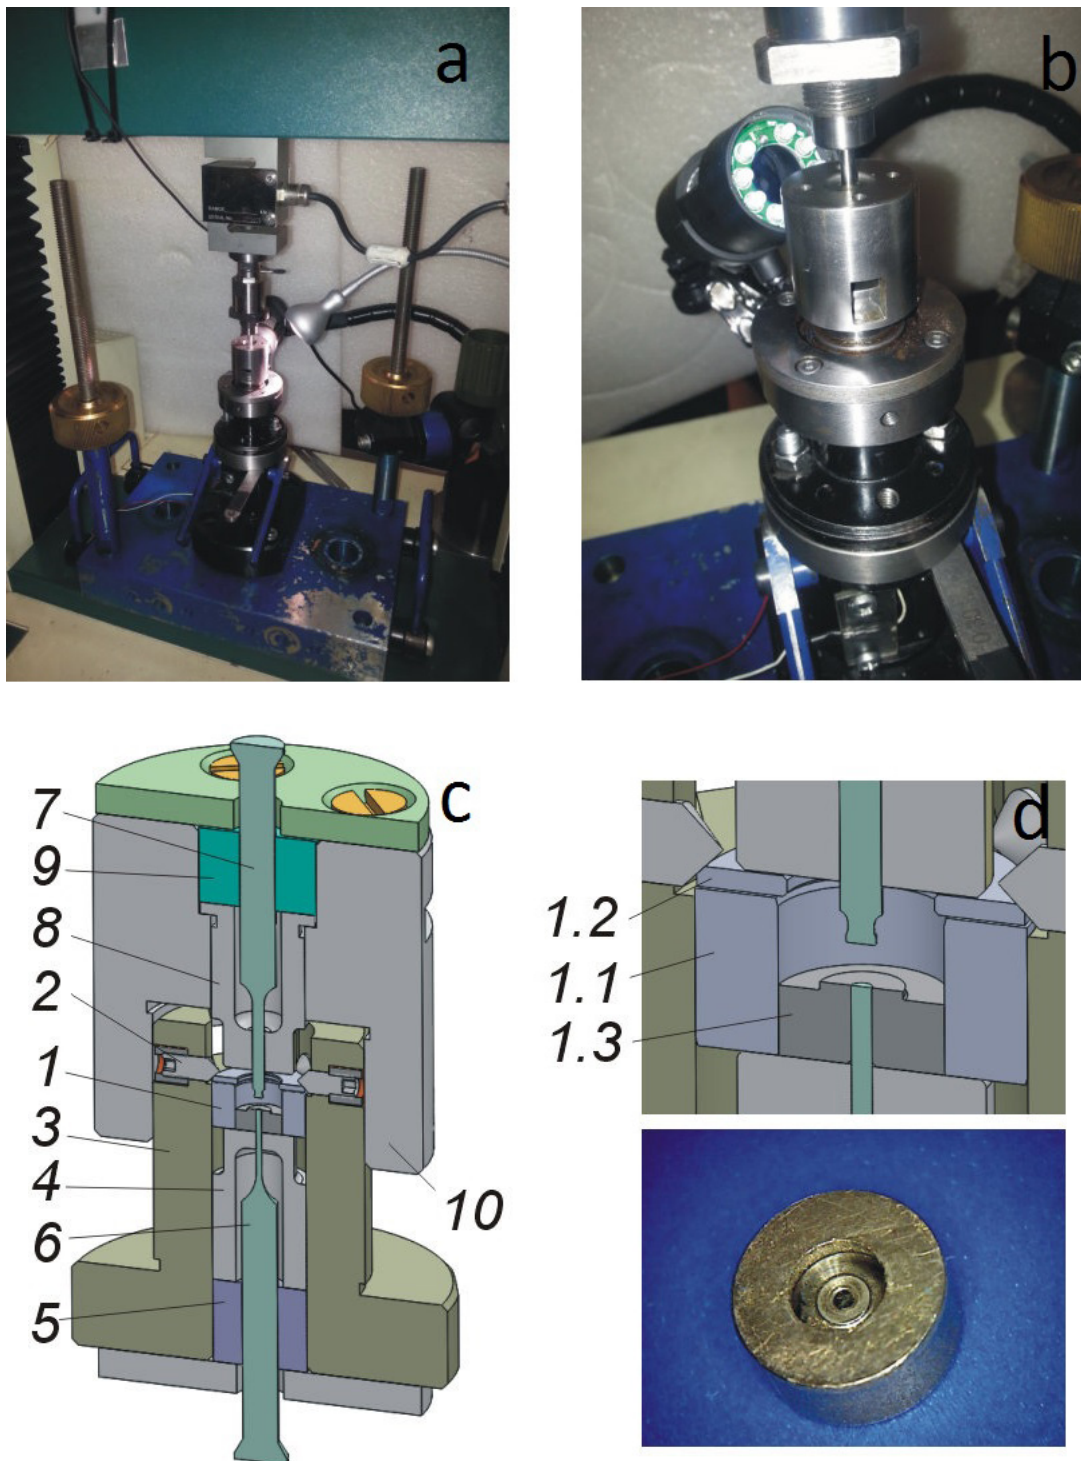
Laboratory stand for investigation of the BiMPs manufacturing: (a) working area, (b) micro-tooling with ejecting system, (c) micro-tooling design: 1 – flexible micro-die, 2 – fixing bolts, 3 – die holder, 4,5 – lower guides, 6 – ejector, 7 – body of the BiMP, 8, 9 – upper guides, 10 – housing, (d) flexible micro-die, 1.1 – ring, 1.2 – cover, 1.3 – example insert
